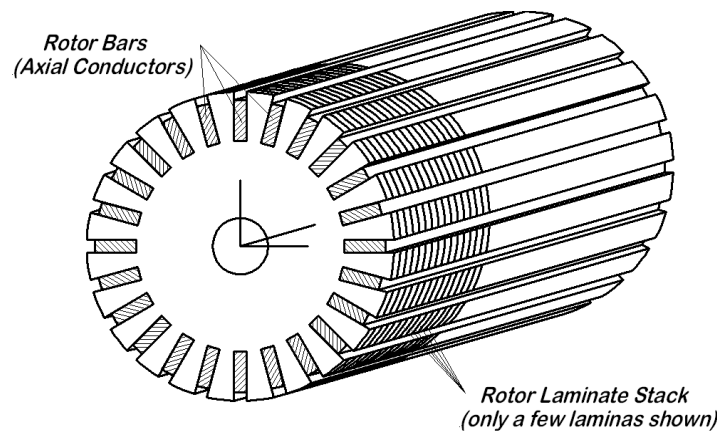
Squirrel Cage Induction Motor Rotor Before End Rings Are Added
